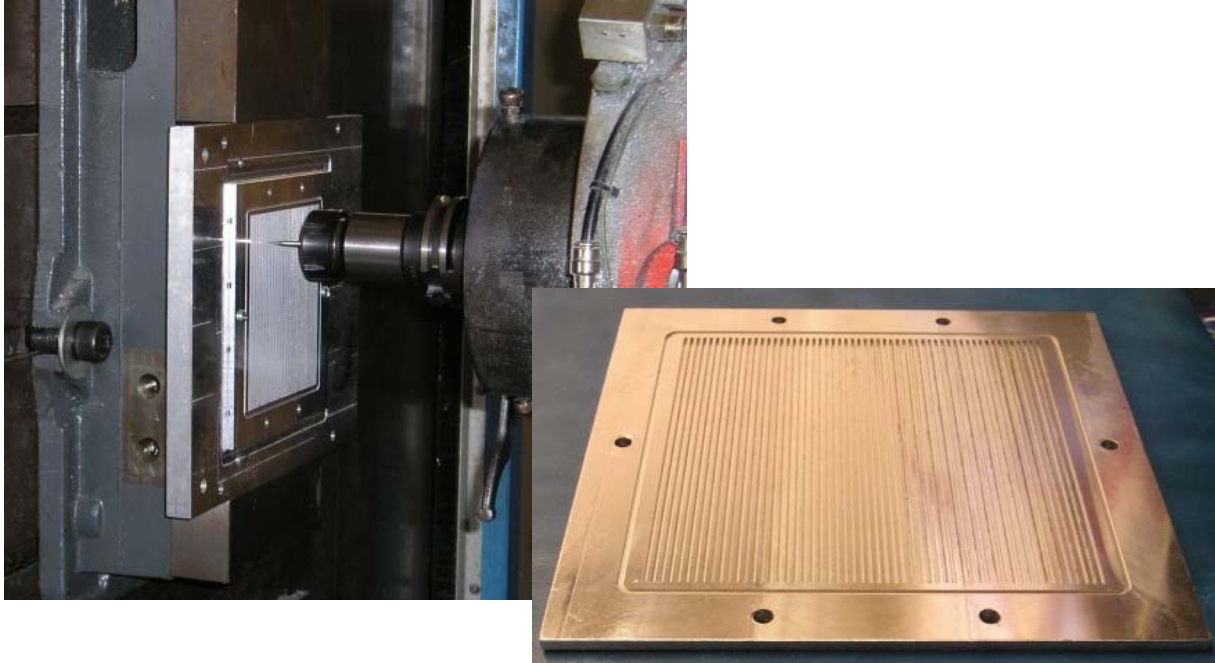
(Left) High-speed machining setup. (Right) Cooling plate with 1 mm channels.
